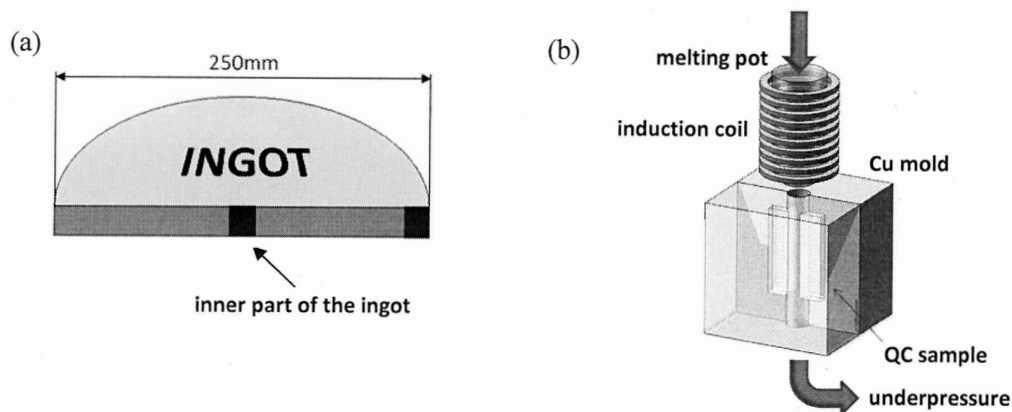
Schematic drawings show: (a) – a piece of ingot and the place where sample IN was cut, (b) – vacuum suction casting process which was used to obtain quick cooled sample (QC).
